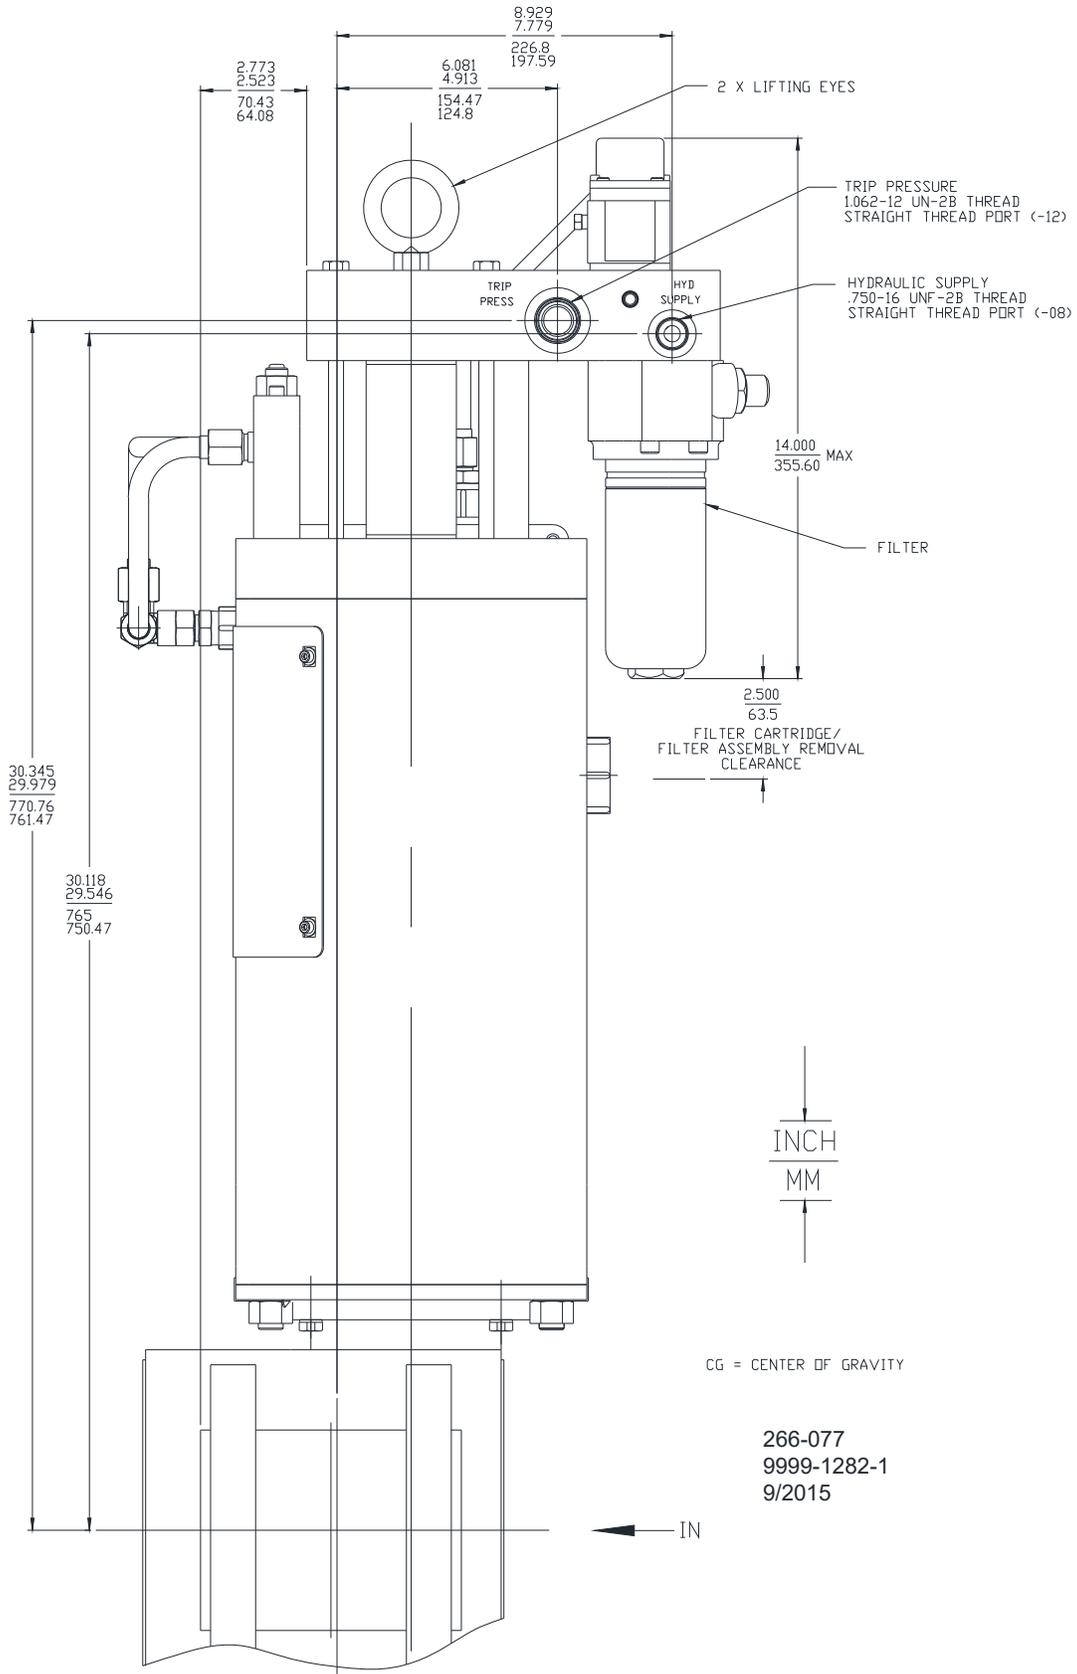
Gas Stop/Ratio Valve Outline Drawing (3-inch) High Pressure Trip (HPT)
